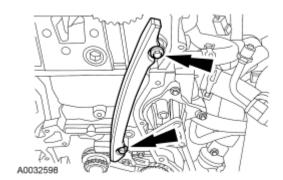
Identifying Bolts And LH Timing Chain Guide Courtesy of FORD MOTOR CO.
